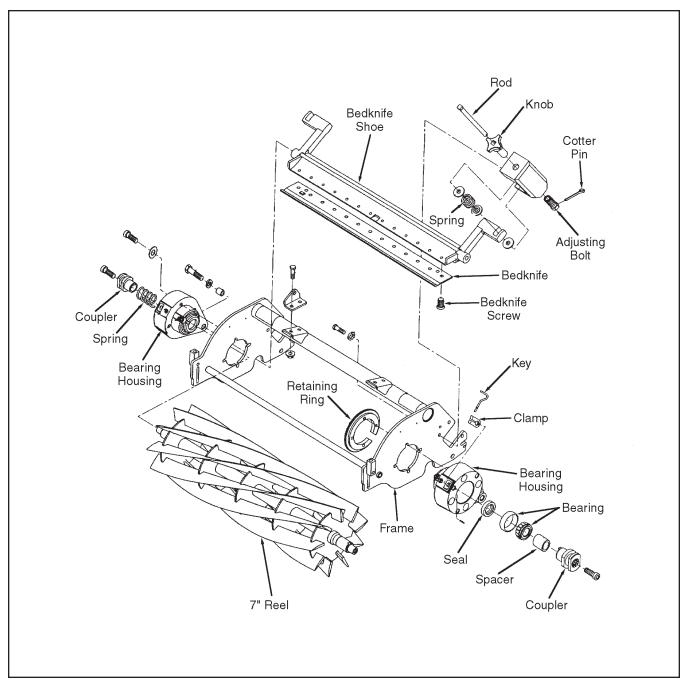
G-4. Mower Unit Disassembly (Sheet 2 of 2)
